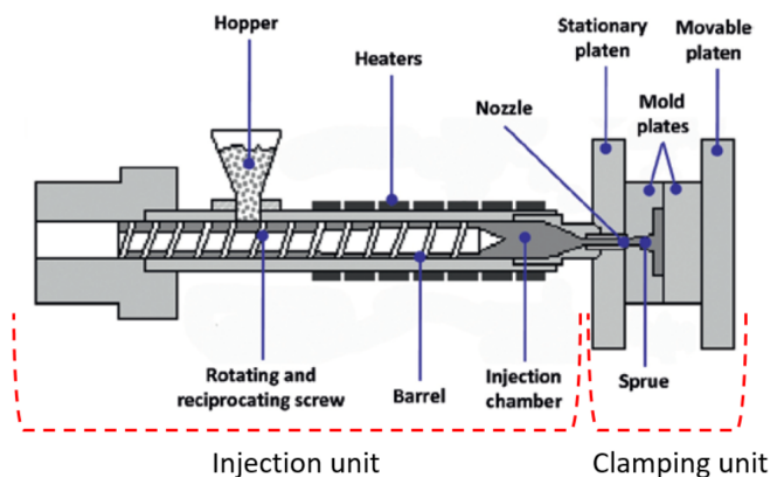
Sketch of a conventional injection moulding machine. Adapted from [44]
